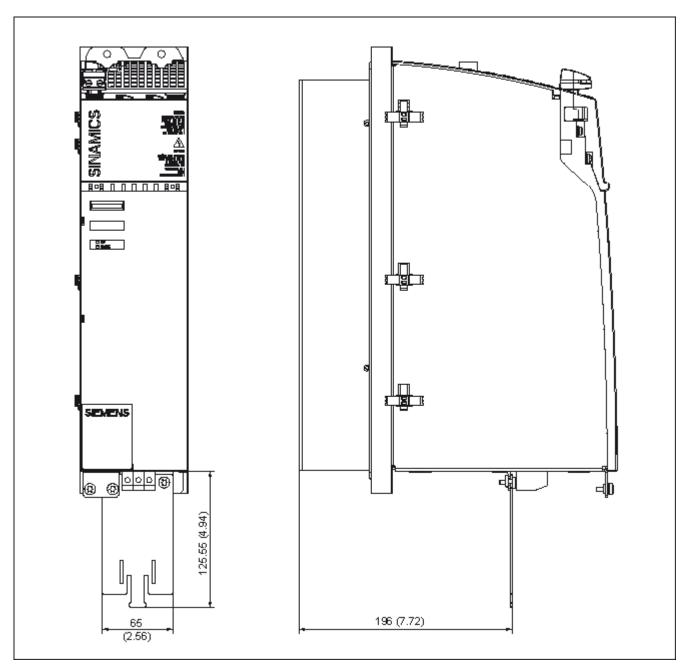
Dimension drawing of shield connecting plate on a 300 mm component with internal air cooling, all dimensions in mm and (inches)
